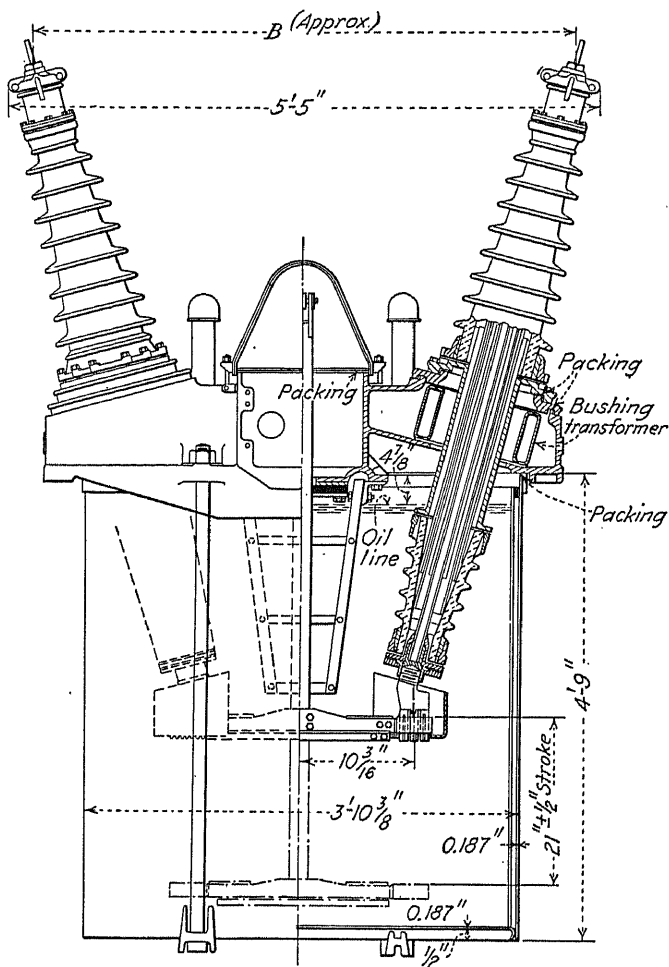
FKO-136-2046A-F-73 oil circuit breaker contacts and bushing details.
